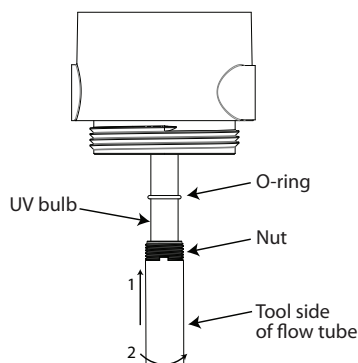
Installation of the bulb o-ring and retention nut using the flow tube tool.
